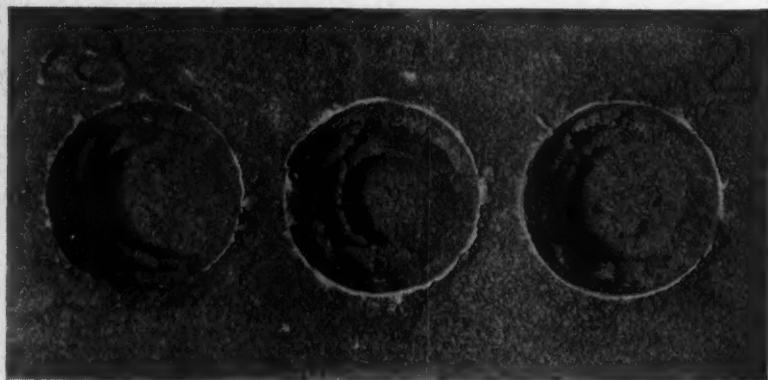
Casting from same heat as casting in Fig. 11; cooled overnight in the mold before shaking out. Note veining but absence of globules of sweated metal.
